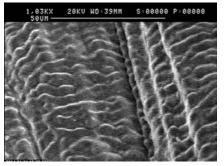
Hot crack in 304 steel after fracturing the specimen. The crack surface with parallel arranged dendrites, the free surface of a crack. SEM image
